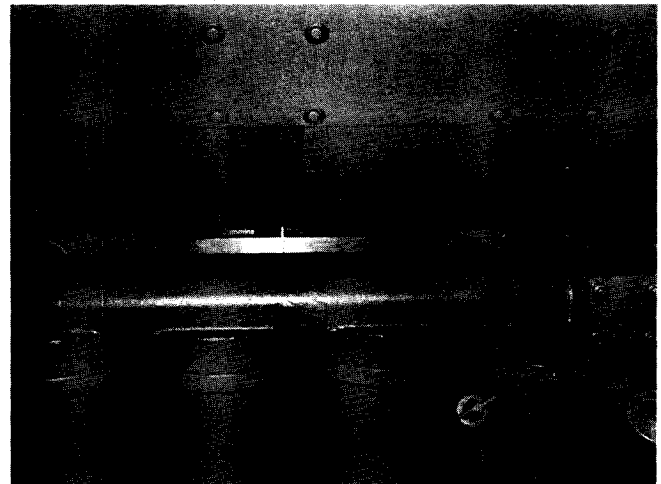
, (K21902). Lubricating system priming point — KT(A)-2300 Engine
